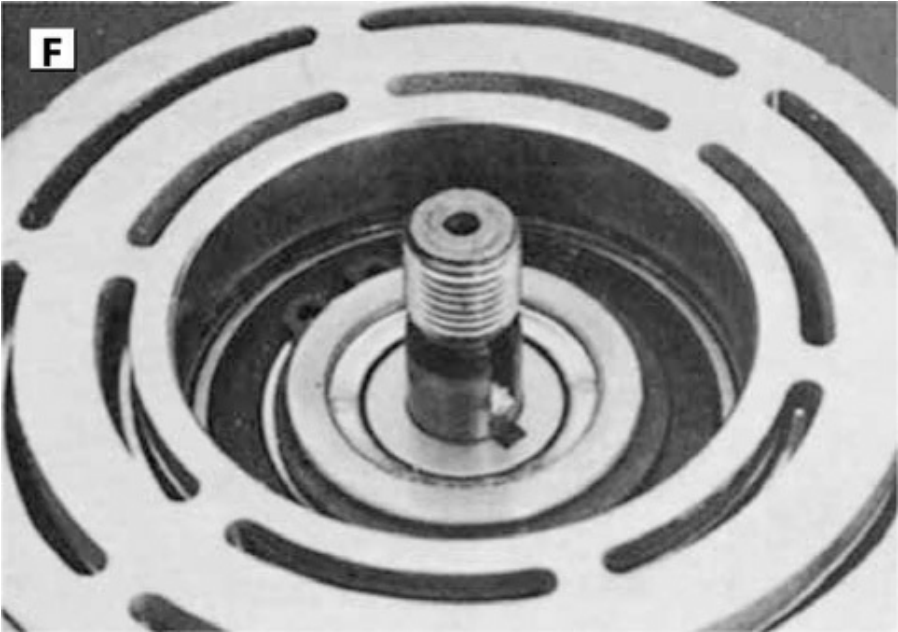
E. 4. On older models, remove the internal bearing snap ring by
